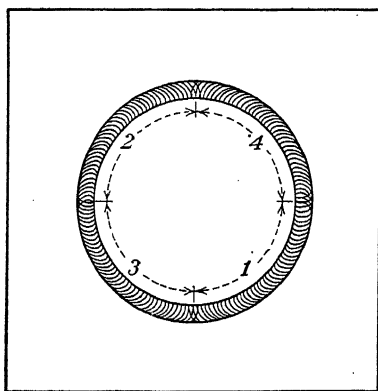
Top view of the tube and plate weld. Weld is made by quarters.
